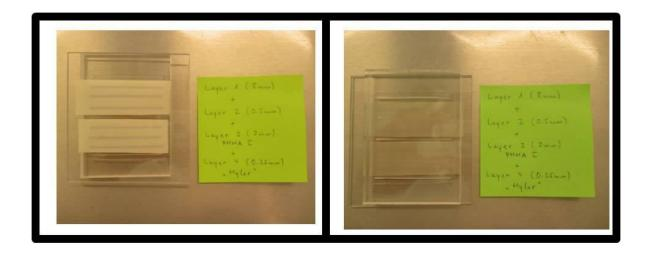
Laser welding tests with different materials. 4 of 5 welded layers
